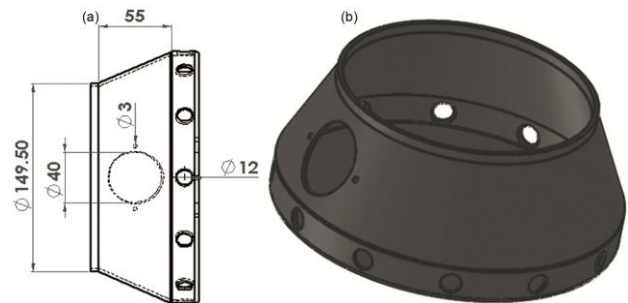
CAD of truncated conical seed chamber (a) side view, and (b) isometric view of seed chamber.
